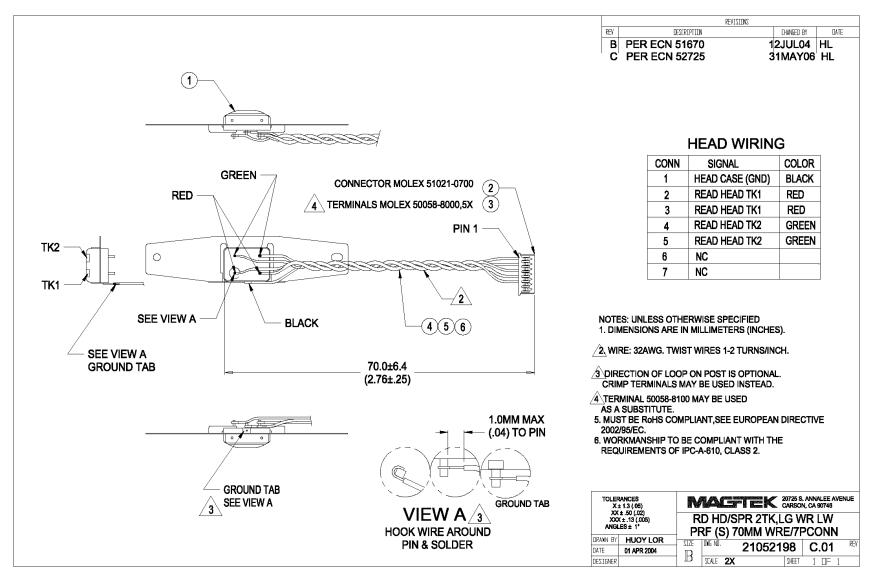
2-Track Read Head Assembly with Cable and 7-Pin Connector
